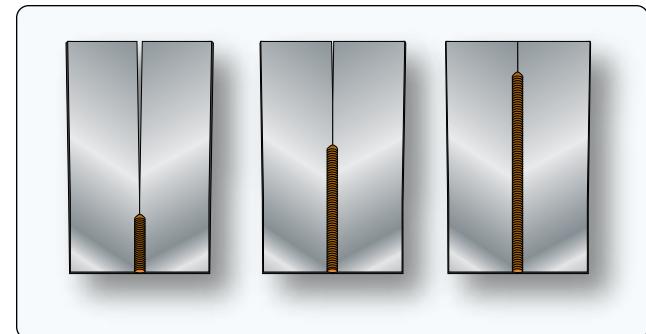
Allowance for a straight butt weld when joining steel sheets.
